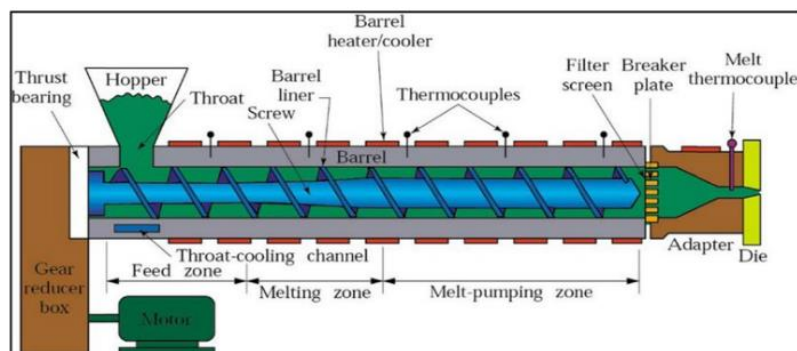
Extruder Machine Parts (Kristiawan et al., 2021)
